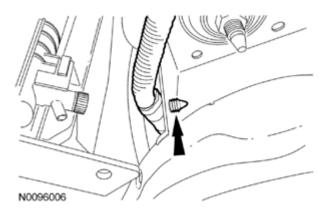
Locating EPAS System Wiring Harness Pin-Type Retainer Courtesy of FORD MOTOR CO.
